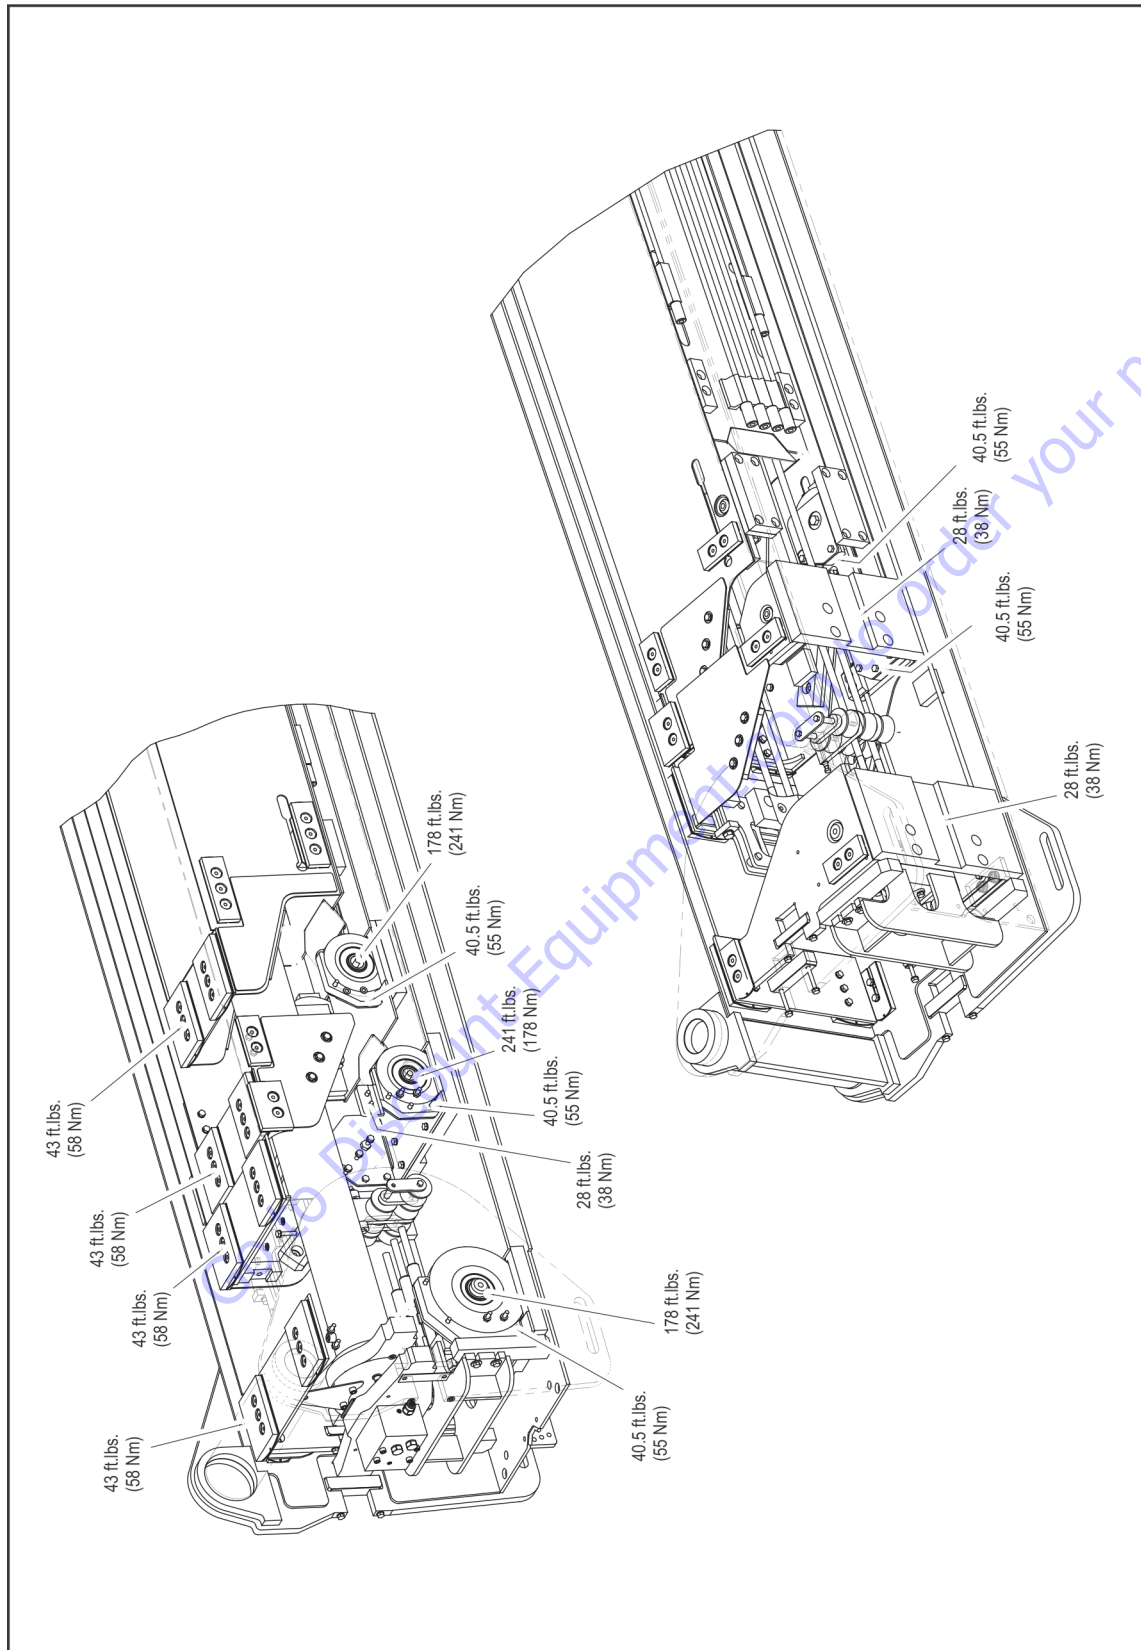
Boom Assembly Torque Values - Sheet 1 of 4
